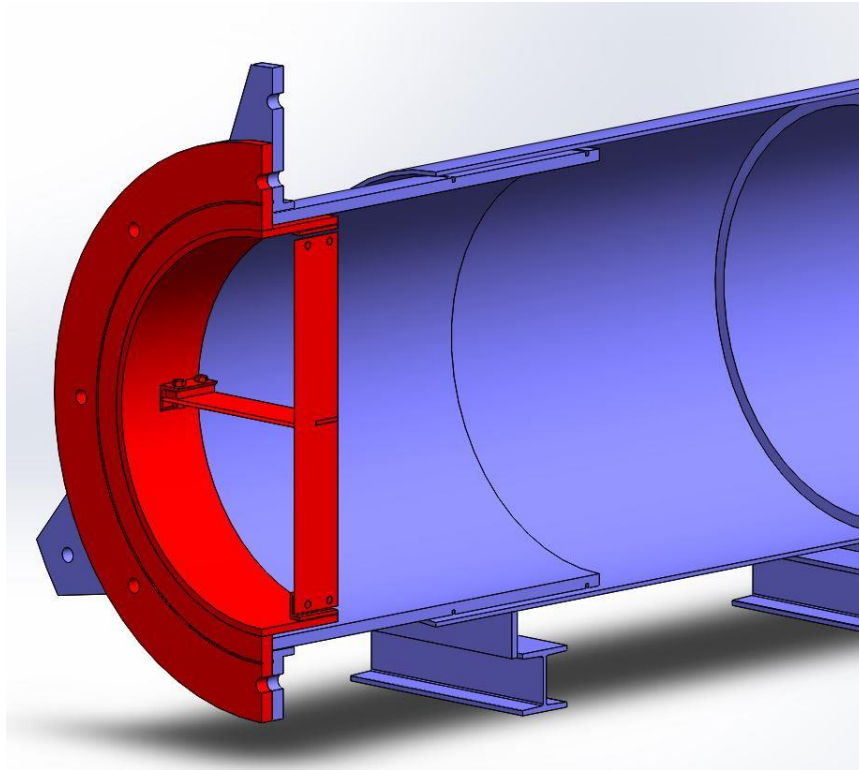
Section view of blade assembly installed in inspection section.
